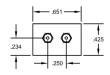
HL9349 with DC bias pins Mechanical Drawing
